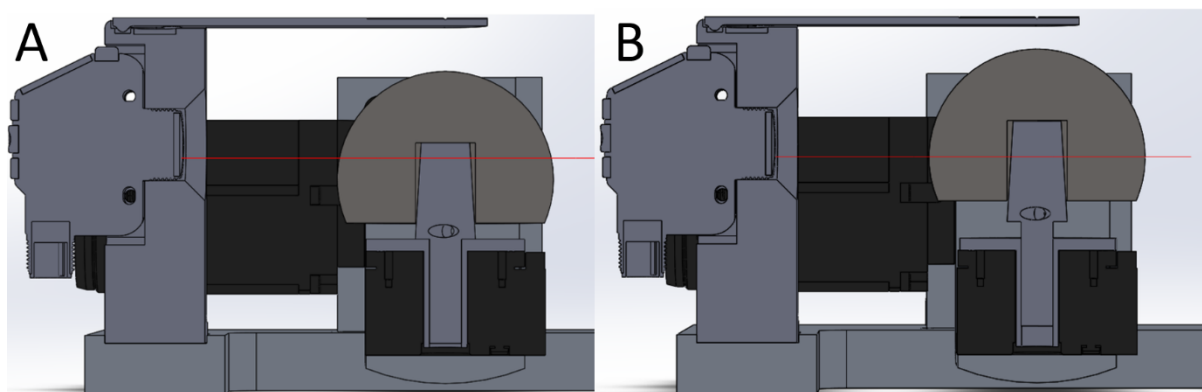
Mounted laser measurement sensor working principle. A: Femoral head is too low. B: Femoral head is raised using the z-screw taper. The display of the laser measurement sensor is checked as the femoral head is raised. Once the smallest distance reading is achieved the femoral head is correctly aligned with the elevation rotary axis.
